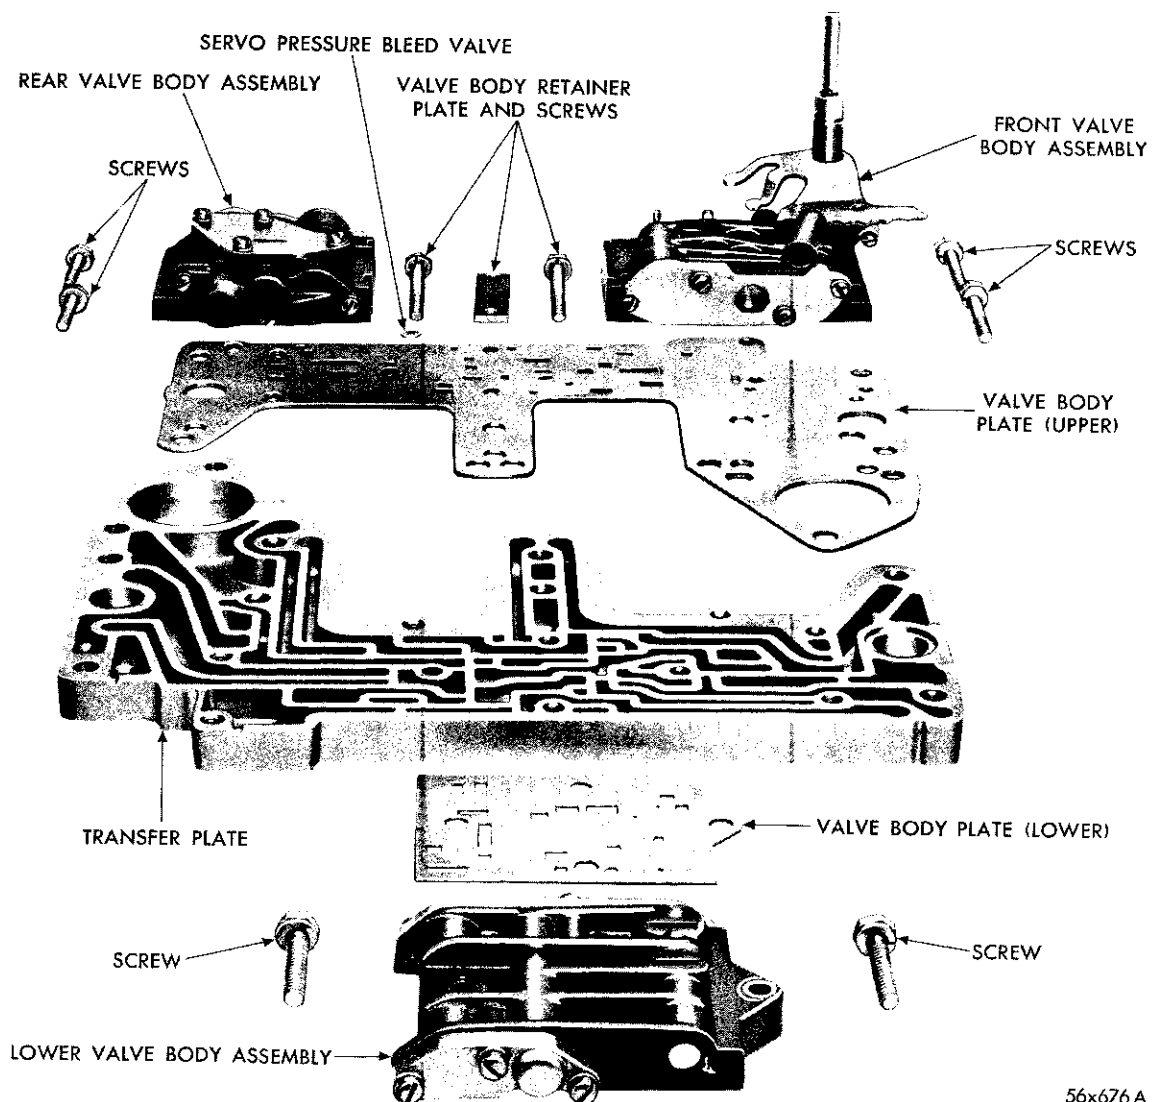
Valve Bodies and Transfer Plate (Separated)
